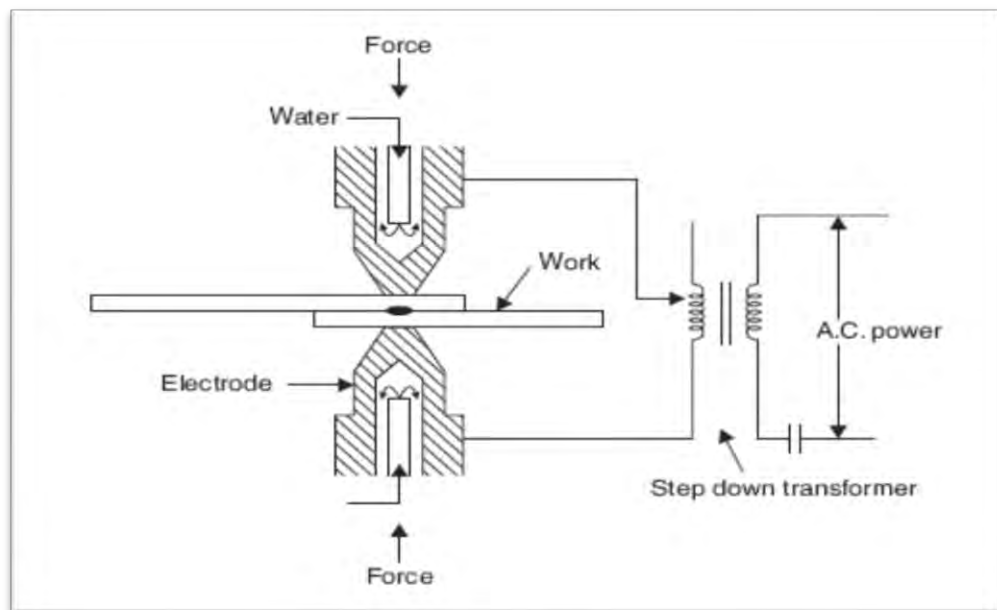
Resistance Spot Welding with work piece.(Hwang et al. 2010)
